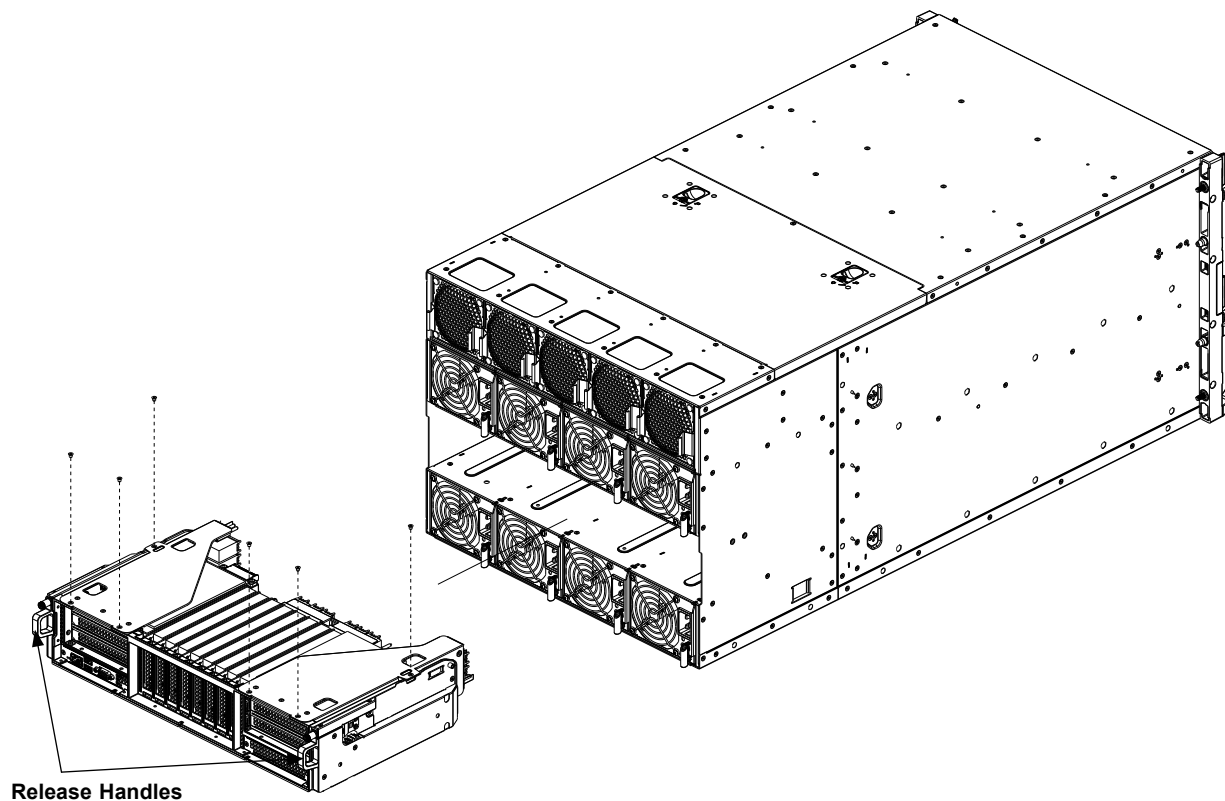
Chassis Rear: Removing the PCIe Expansion Tray
